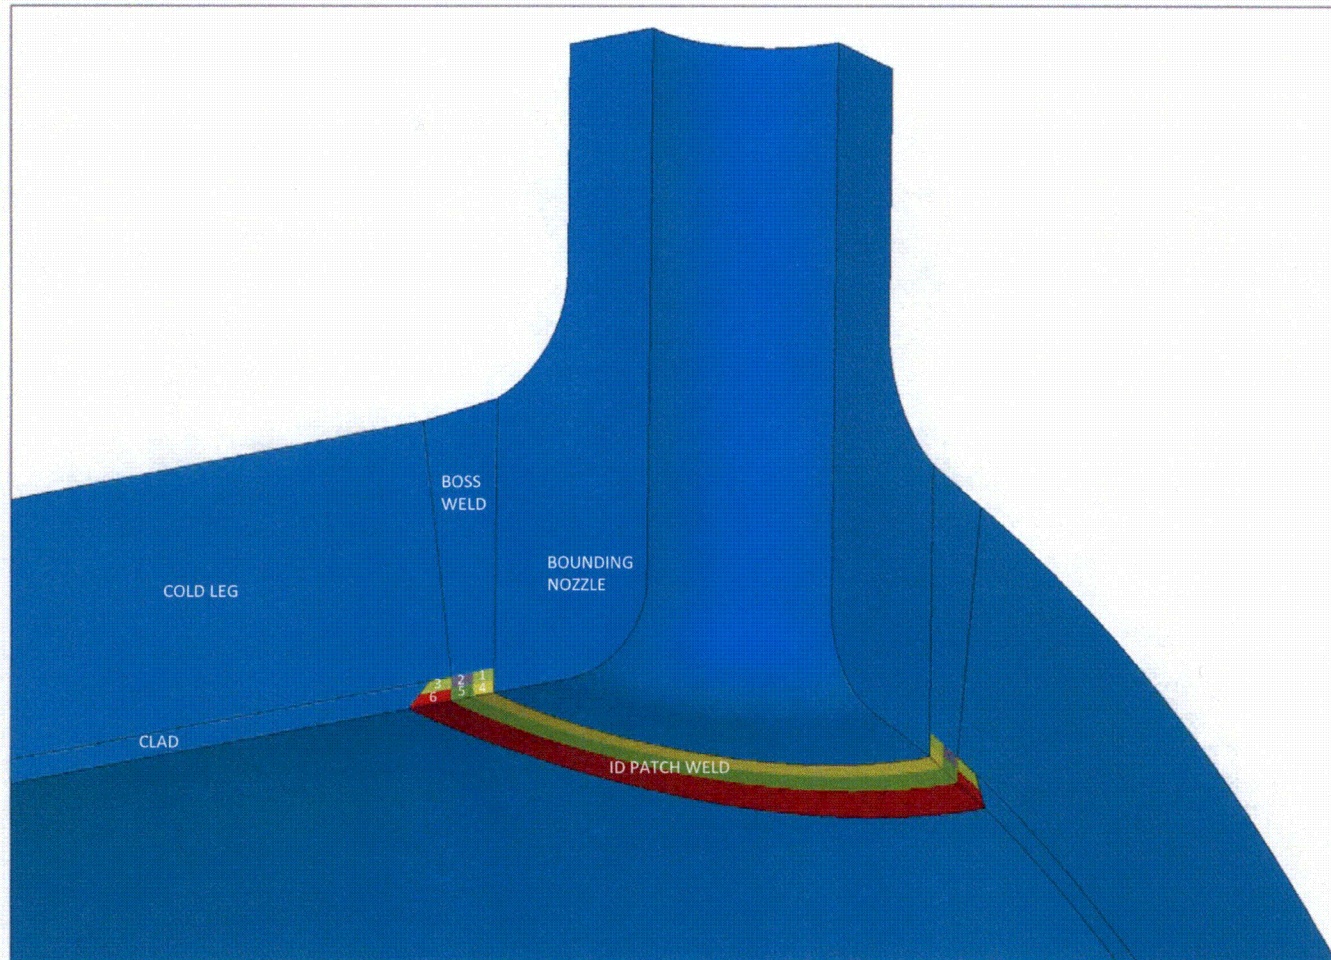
Weld Nugget Definitions for the Bounding Cold Leg Nozzle ID Patch Weld
